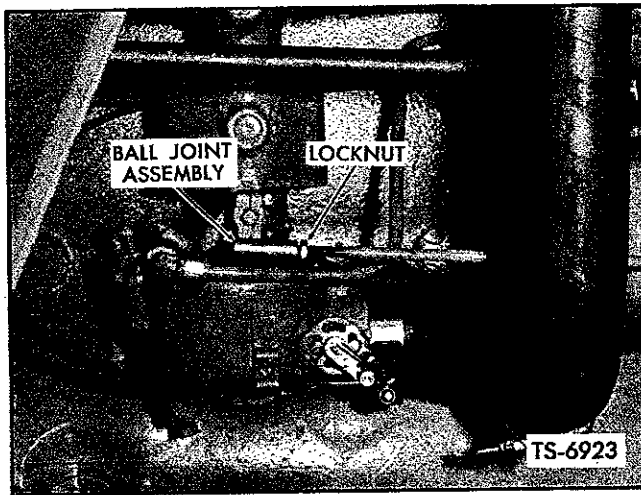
Adjust Throttle Linkage — Waukesha Gas
